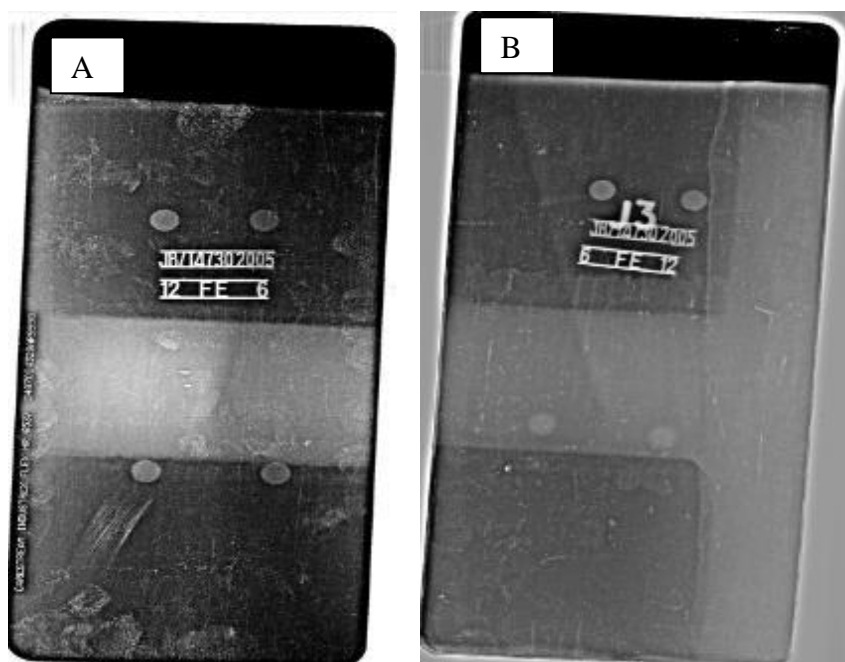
X-ray images showing the web region of a thermite welded rail with a weld gap: (a) 40 mm and (b) 50 mm.
